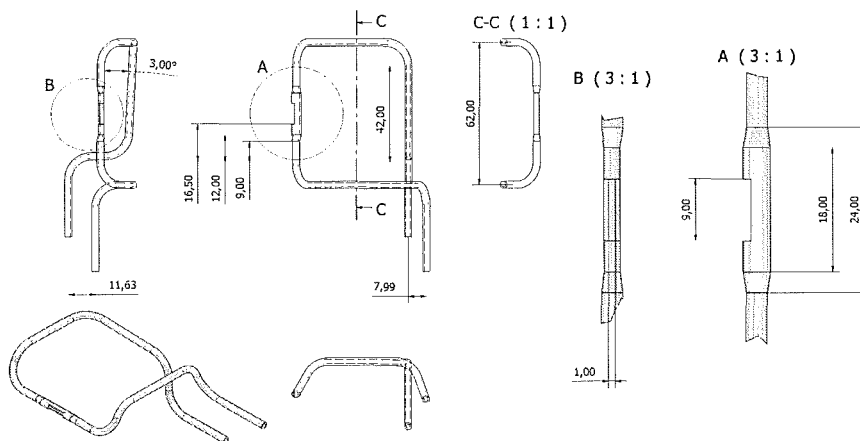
Technical diagram showing the geometry formed into 1/8" outer diameter copper tube used to supply water inside the shroud, and produce a flat nozzle for shaped water flow.
